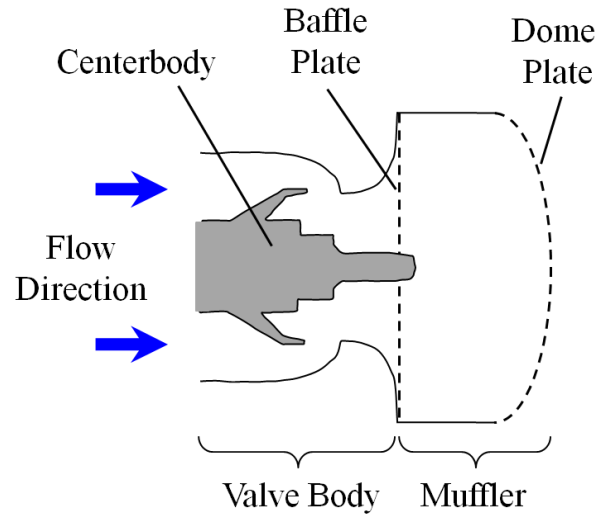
Schematic of pneumatic bleed valve assembly used on aircraft engines [2]
